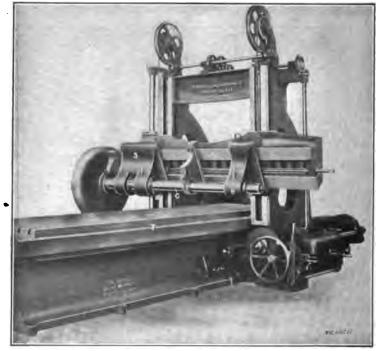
Ingersoll Horizontal or Planer-type Milling Machine
